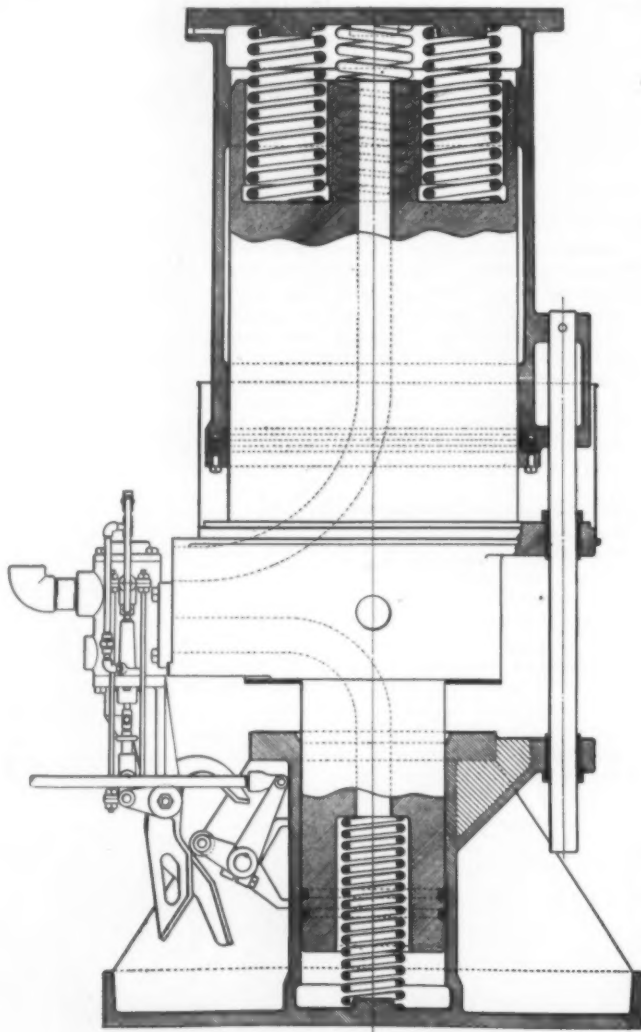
Sectional elevation of the Shockless Jarring Machine.
